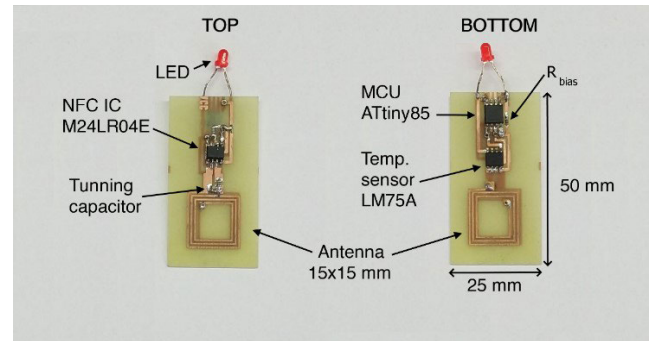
Photograph of the tag manufactured for measurements: top view (left) and bottom view (right).
